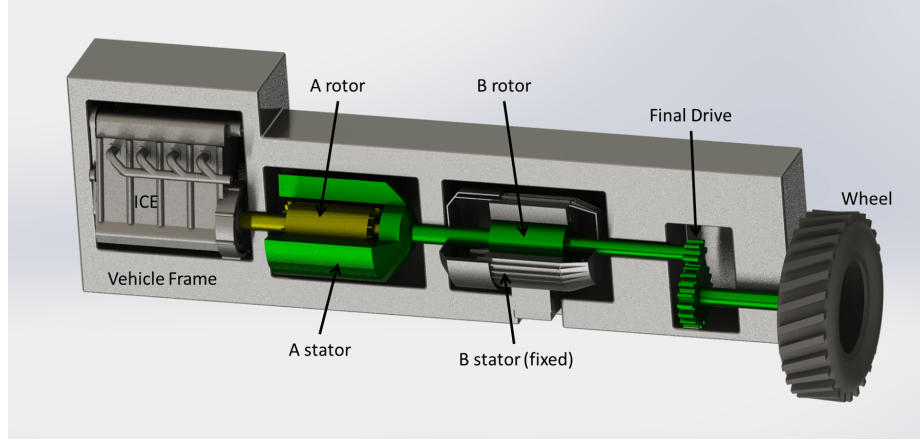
Structure of the novel powertrain showing the ICE, the A machine which has a rotating stator and the conventional B machine. The A machine controls the angular velocity transmitted to the wheels, and the B machine controls the torque transmitted to the wheel
